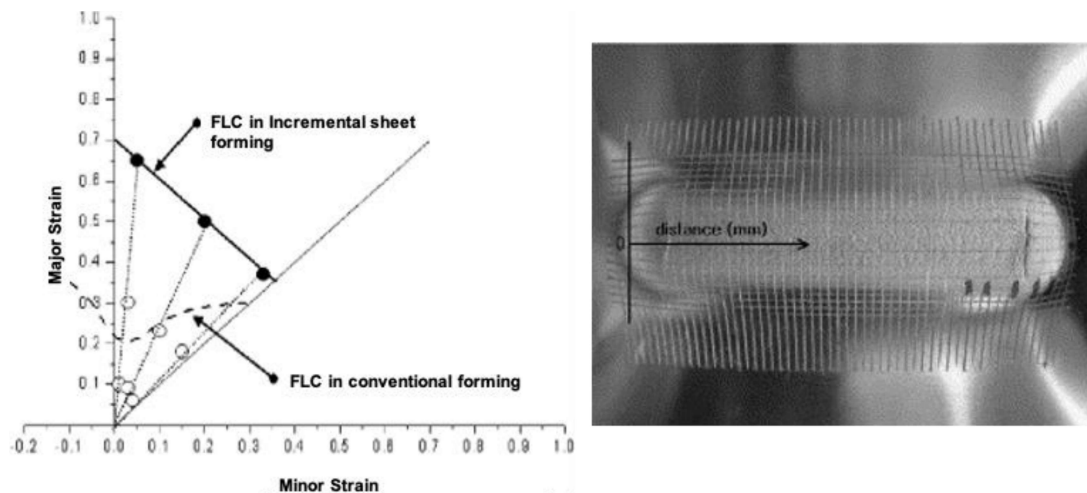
(a) Comparison of FLC of conventional forming and ISF (b) Sample for straight groove test.
